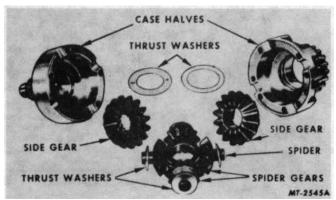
Components Of Inter-Axle Differential Disassemble Power Divider Intermediate Case
